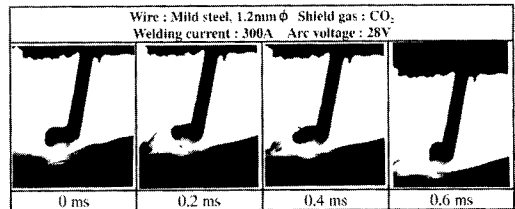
Repelled transfer in CO₂ welding with filming speed of 4,000fps
